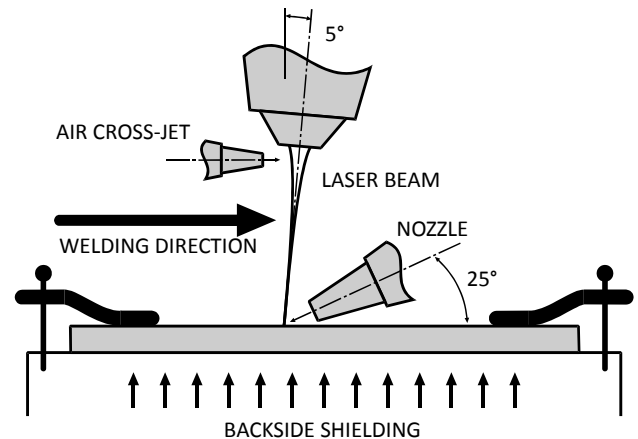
SUGGESTED WELDING SYSTEM SET-UP
